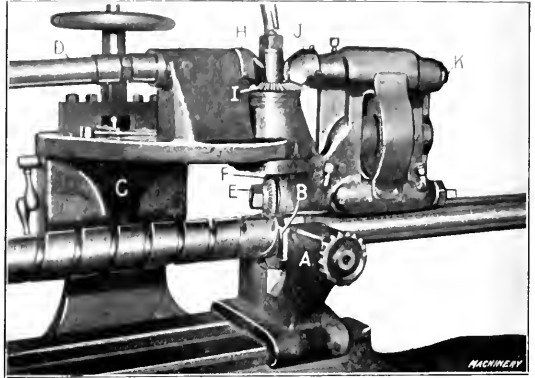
The Cutter Head, showing Drive and Method of supporting Work
